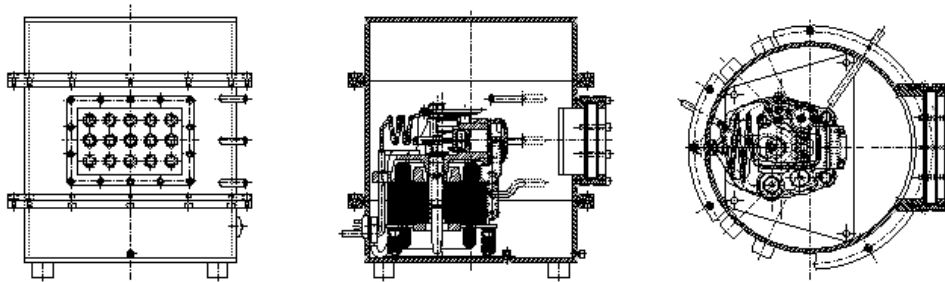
Hermetic reciprocating compressor prototype scheme: front, side and top views respectively.
